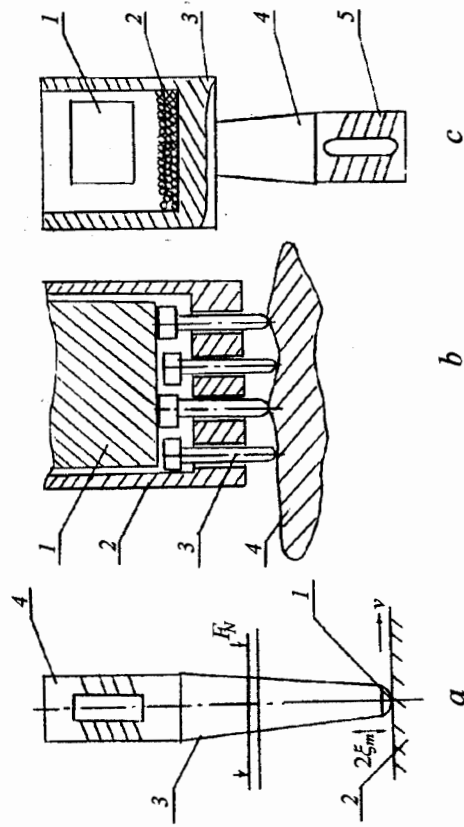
Schematic representation of ultrasonic surface treatment methods (a) with a single vibrating instrument [92], (b) with a multi-tool instrument [92], and (c) with free bodies [94]. Panel a: (1) tip, (2) workpiece, (3) ultrasonic horn, (4) electroacoustic transducer. Panel b: (1) horn, (2) cartridge, (3) tools, (4) workpiece. Panel c: (1) workpiece, (2) balls, (3) vibrated chamber, (4) ultrasonic horn, (5) electroacoustic transducer.
